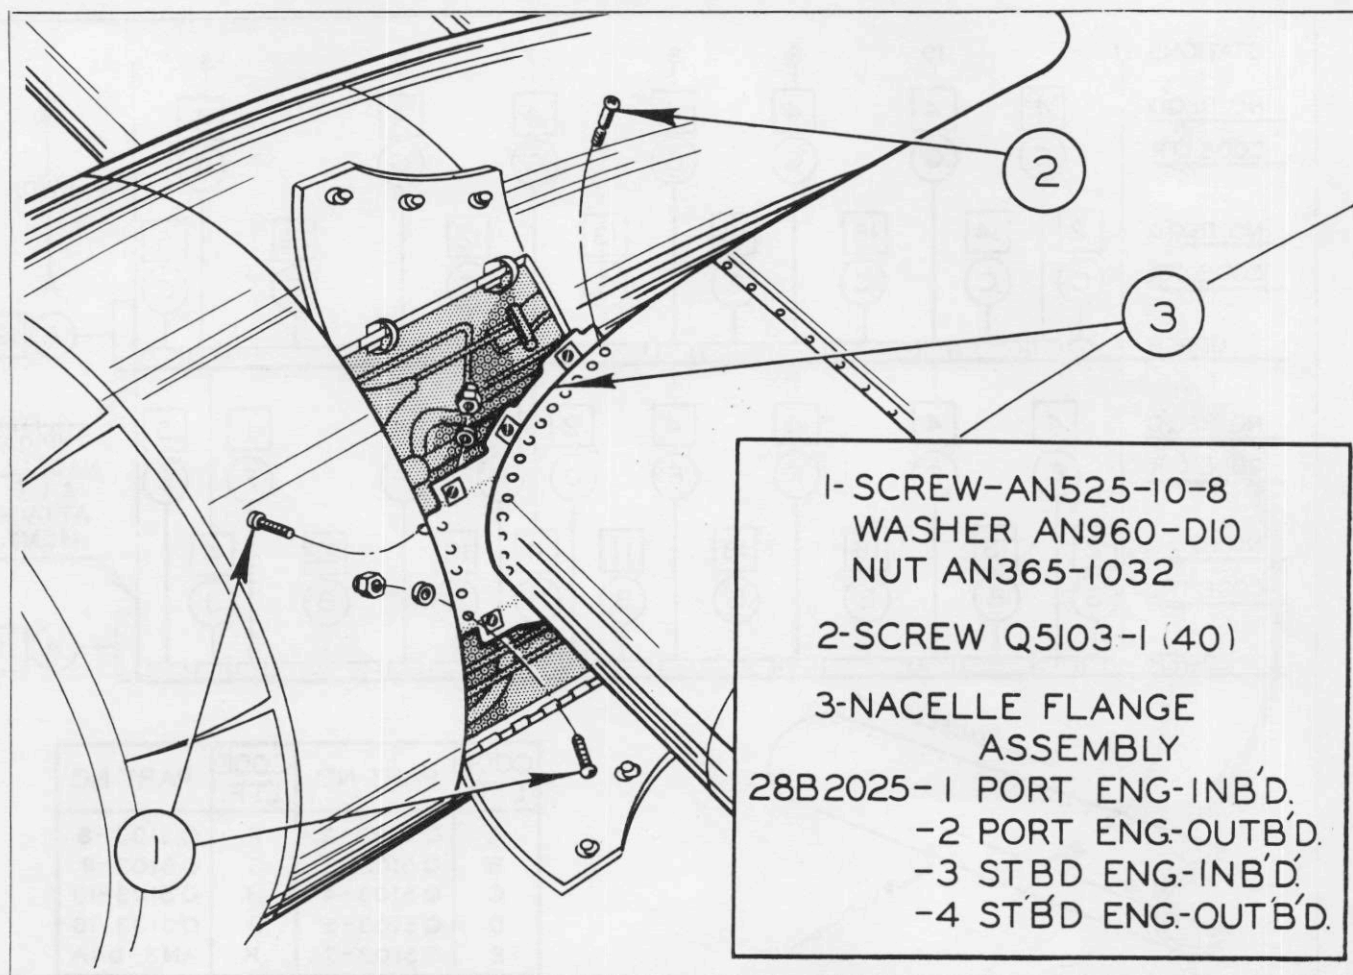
Screw Diagram—Leading Edge—Nacelle Flange Assembly
